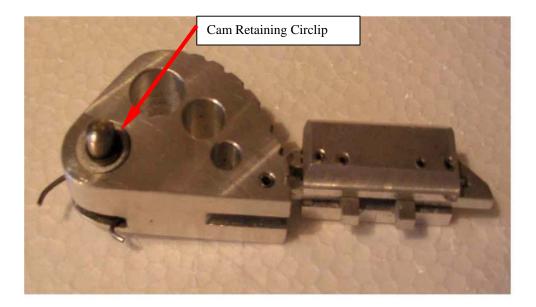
The Initial Trigger Release Mechanism: that was resized to accommodate the larger cams. The photograph also shows the blocking cam actuating spring and retaining circlip.
